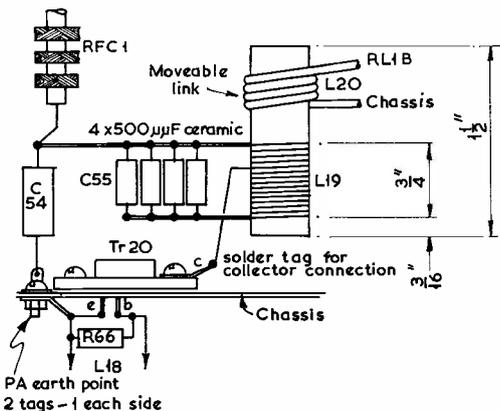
1.8-2.0mc PA tank assembly L19/L20
